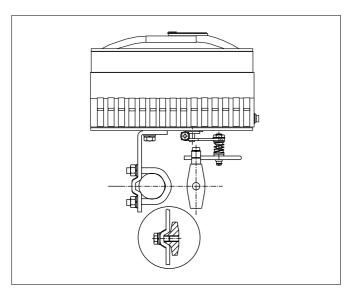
Mounting to linear actuators to DIN/IEC 534 / NAMUR
